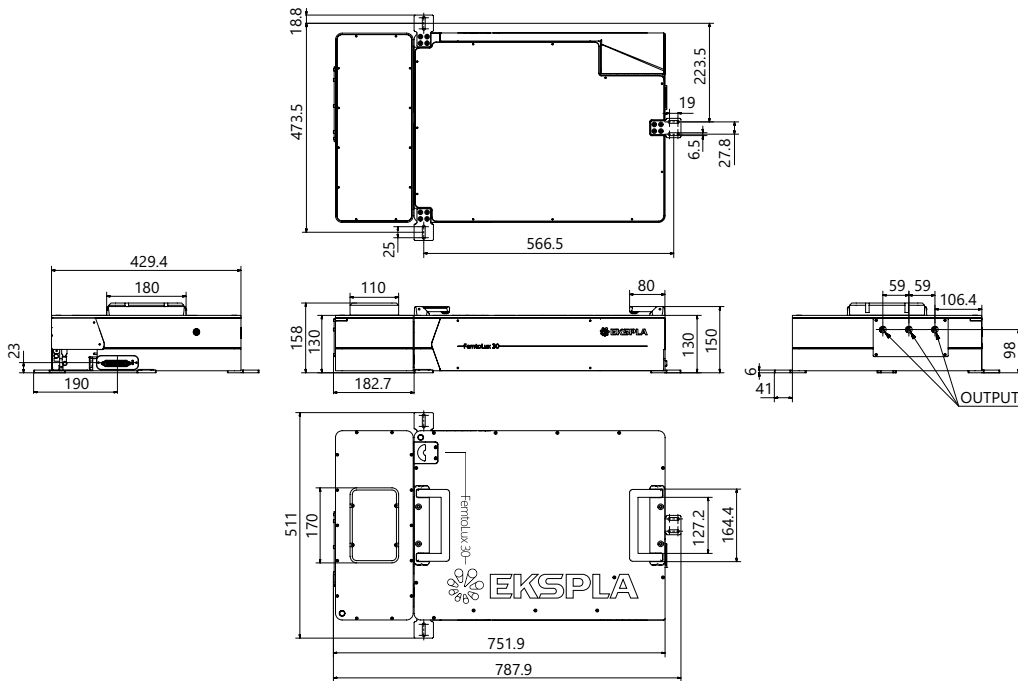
FemtoLux 30 with second harmonic option. Laser head outline drawing
